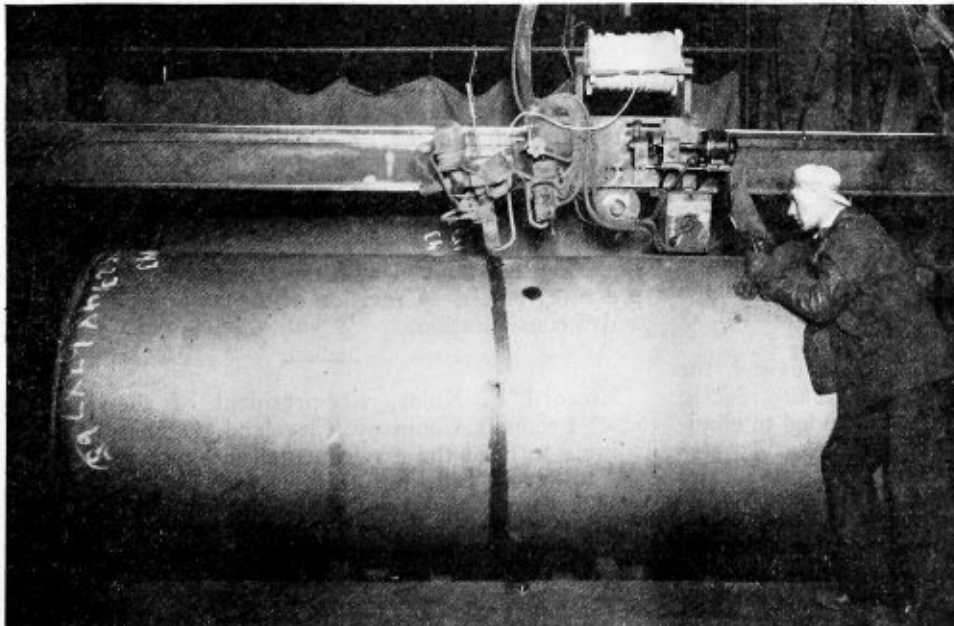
(Top) Semi-automatic fixture for fusing heads and bottoms in range boilers. Fig. 4. — (Left) Automatic welder for circumferential and longitudinal seams on large tanks
